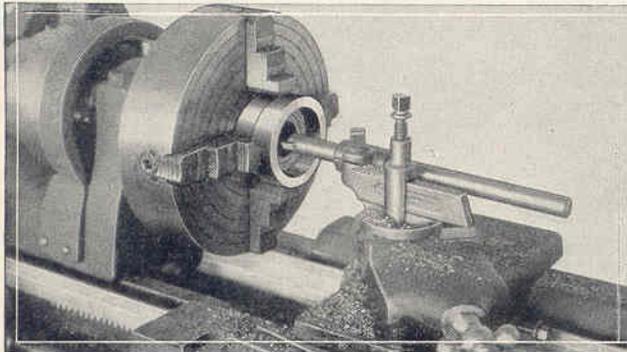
Boring a Cast Iron Gear Blank Held in a Chuck.
